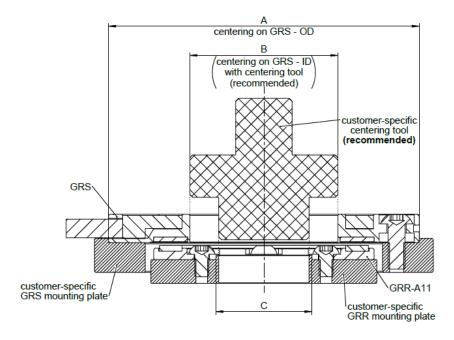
GMI Rotary Encoder: GRS sensor-side mounting and centering recommendation
